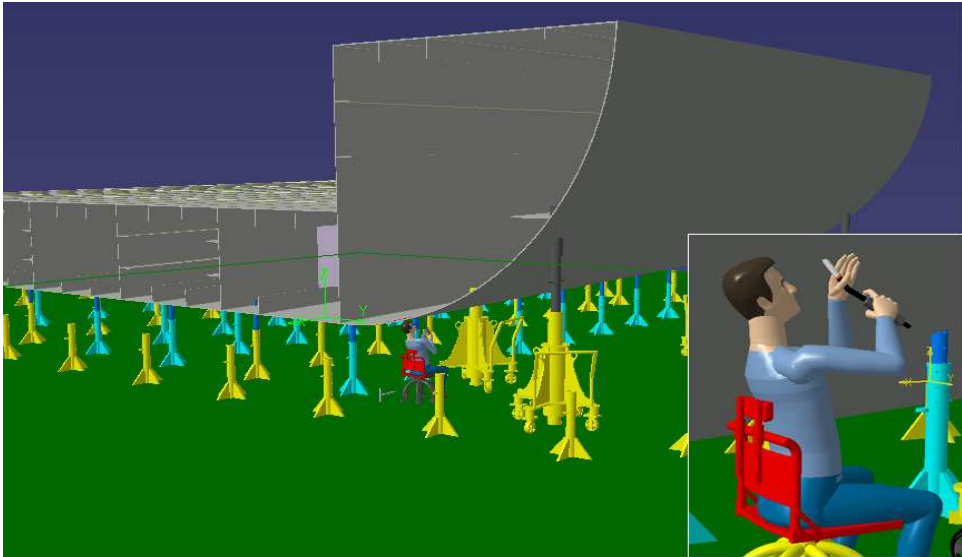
Layout of overhead welding in sitting posture.
